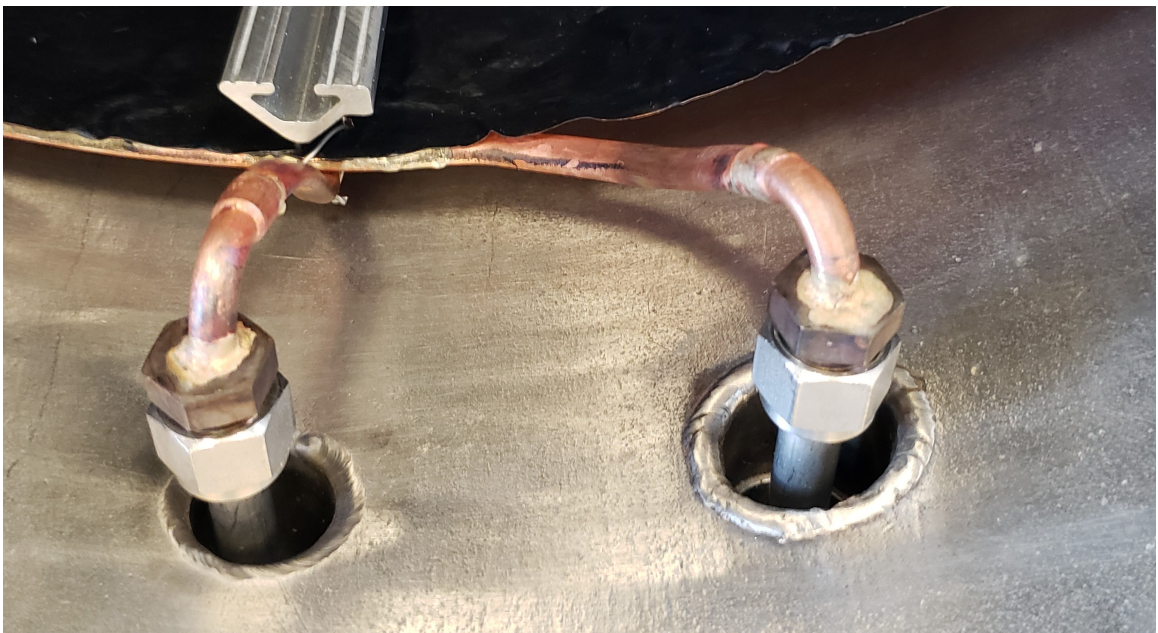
Shroud coolant tubing connections after brazing and fastening
